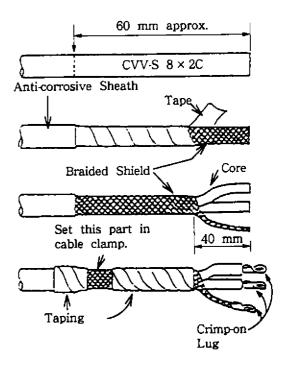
Fabricating power cable CVV-S 8 x 2C
